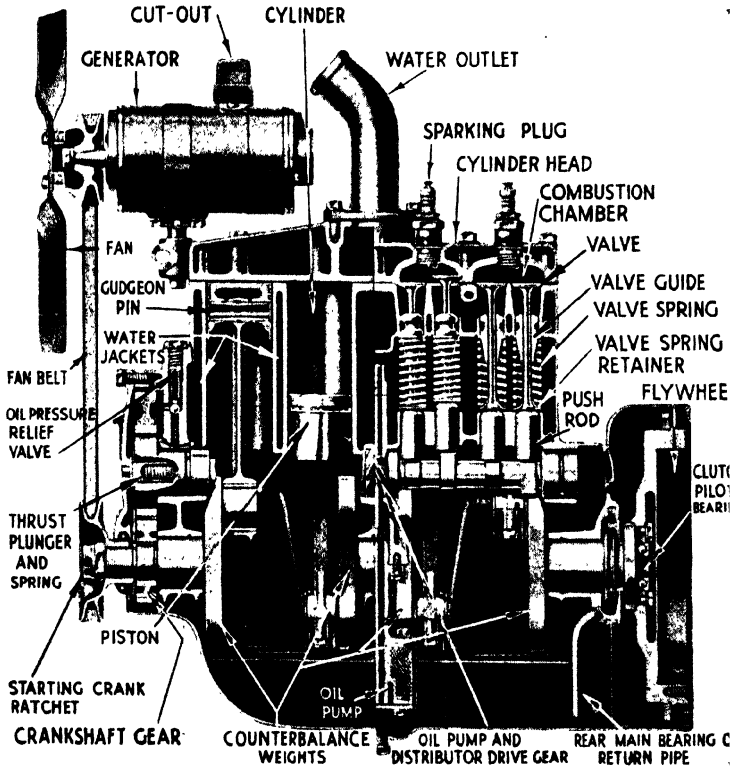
THE POWER UNIT OF THE FORD EIGHT IS OF THE SIDE-VALVE TYPE AND IS NOTABLE FOR ITS LOW WEIGHT. The non-adjustable valve tappets, designed for long life, are typical of Ford practice. Note the counter-balanced crankshaft.
